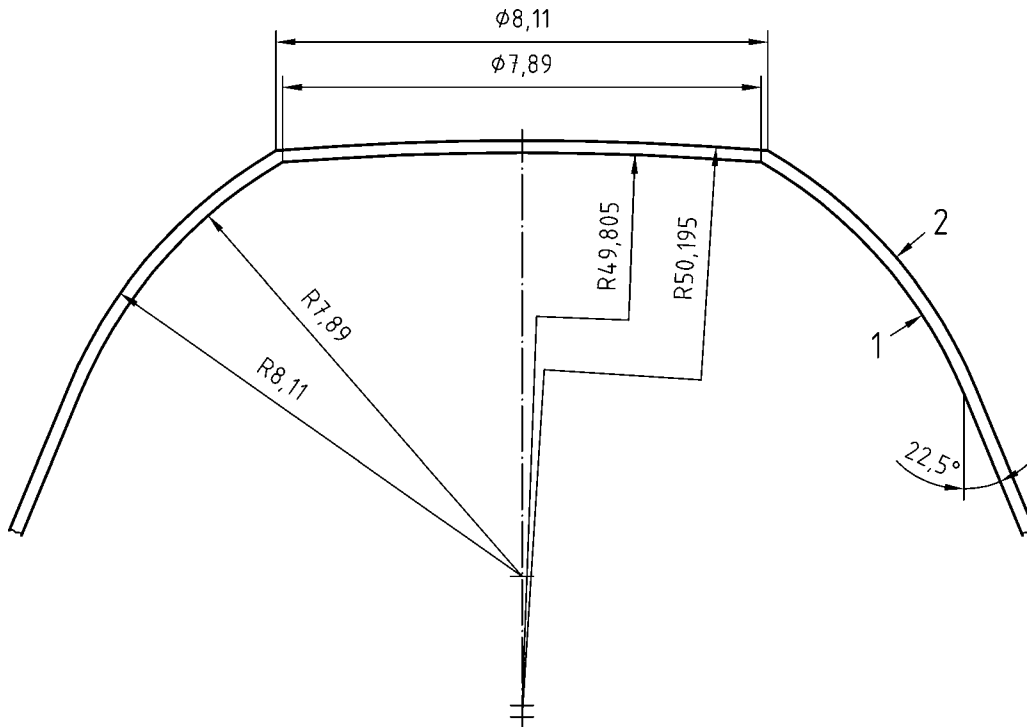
Control gauge for electrodes used on sheet of 0,8 mm (G 16x20)
